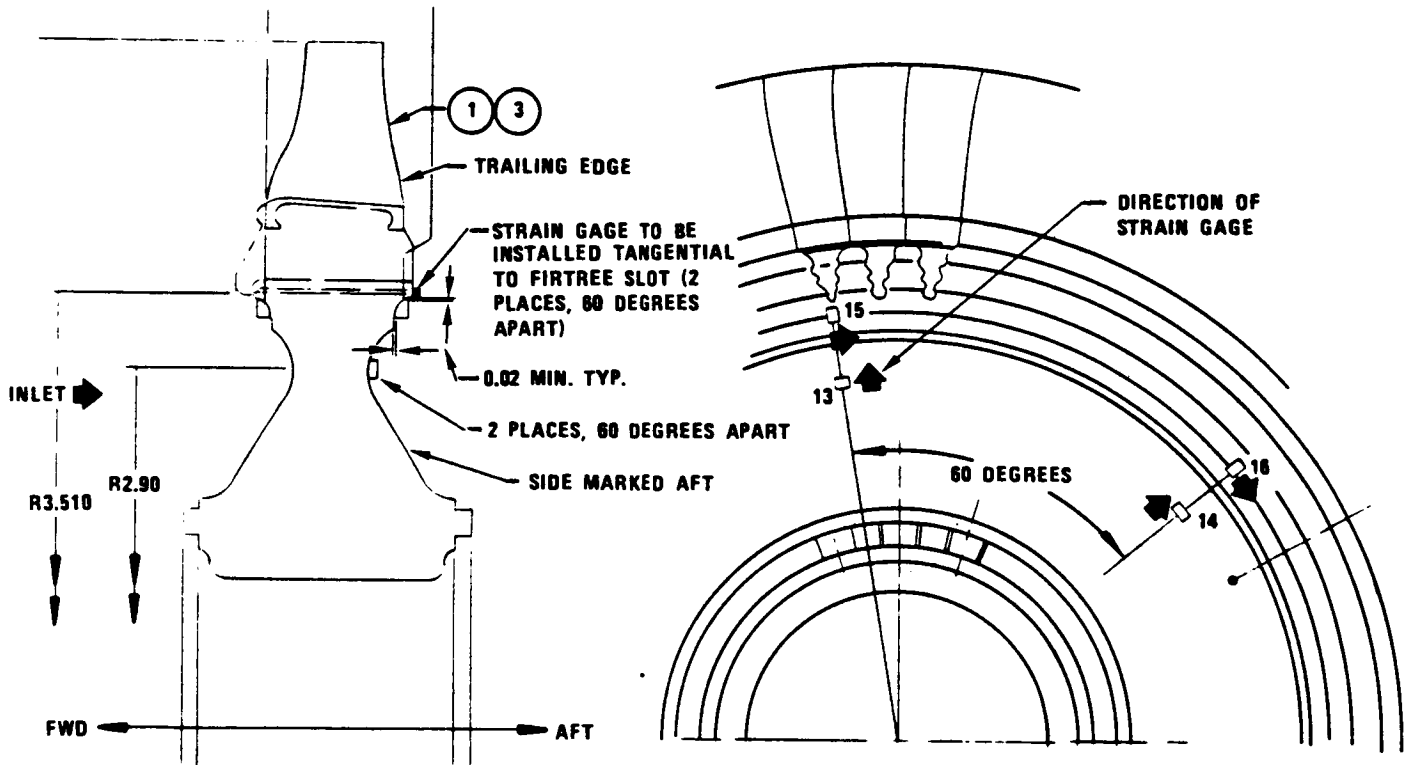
NASA/MATE MA6000 Blade Whirlpit Test Rotor Assembly.
